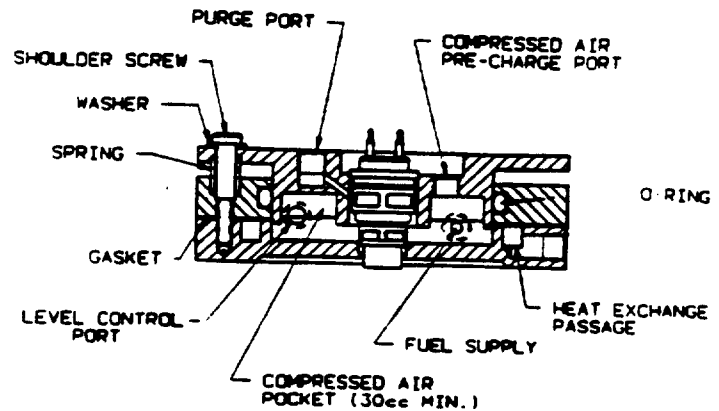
BOTTOM FEED INJECTOR TEST HEAD
